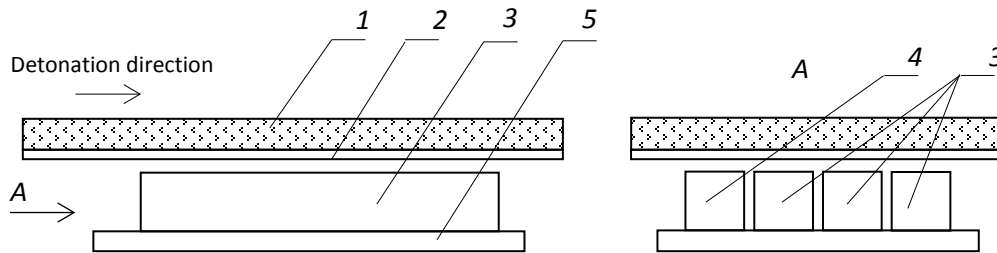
Welding of a copper plate with samples of different hardness: 1 explosive charge, 2 copper plate; 3 steel samples, 4 aluminum sample, and 5 base.
